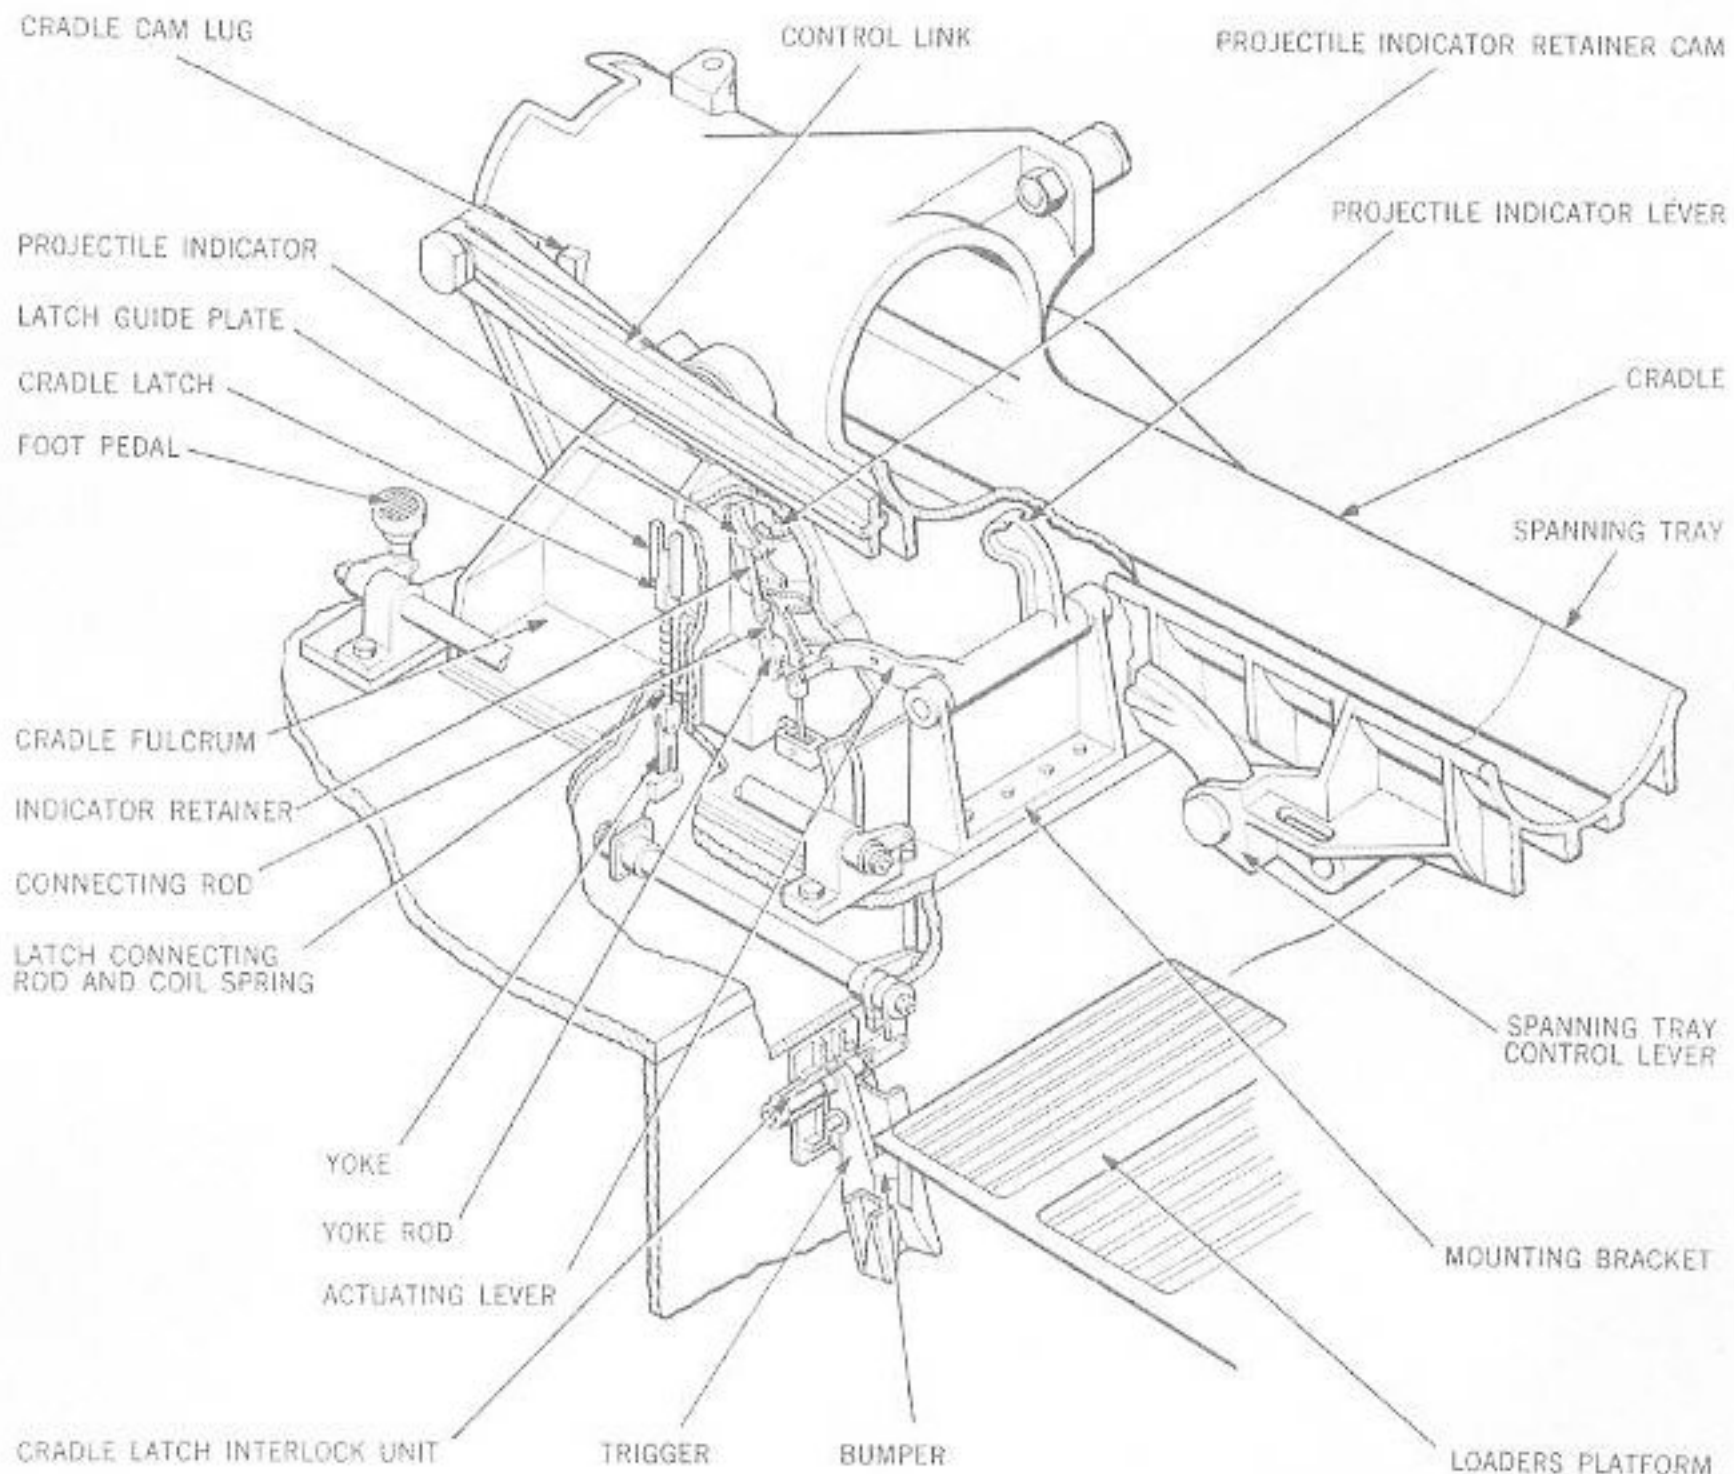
Projectile Hoist Cradle and Cradle Control Devices
